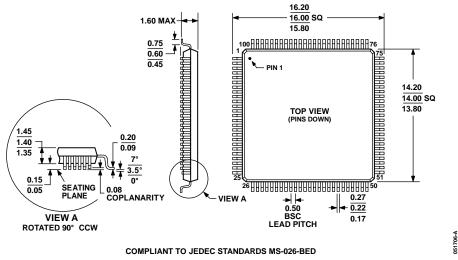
100-Lead Low Profile Quad Flat Package [LQFP] (ST-100-1) Dimension shown in millimeters
